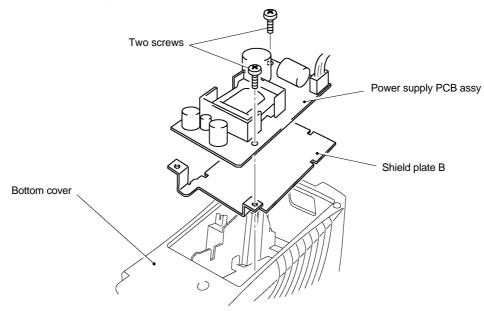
Removing the Power Supply PCB Assy and Shield Plate B
